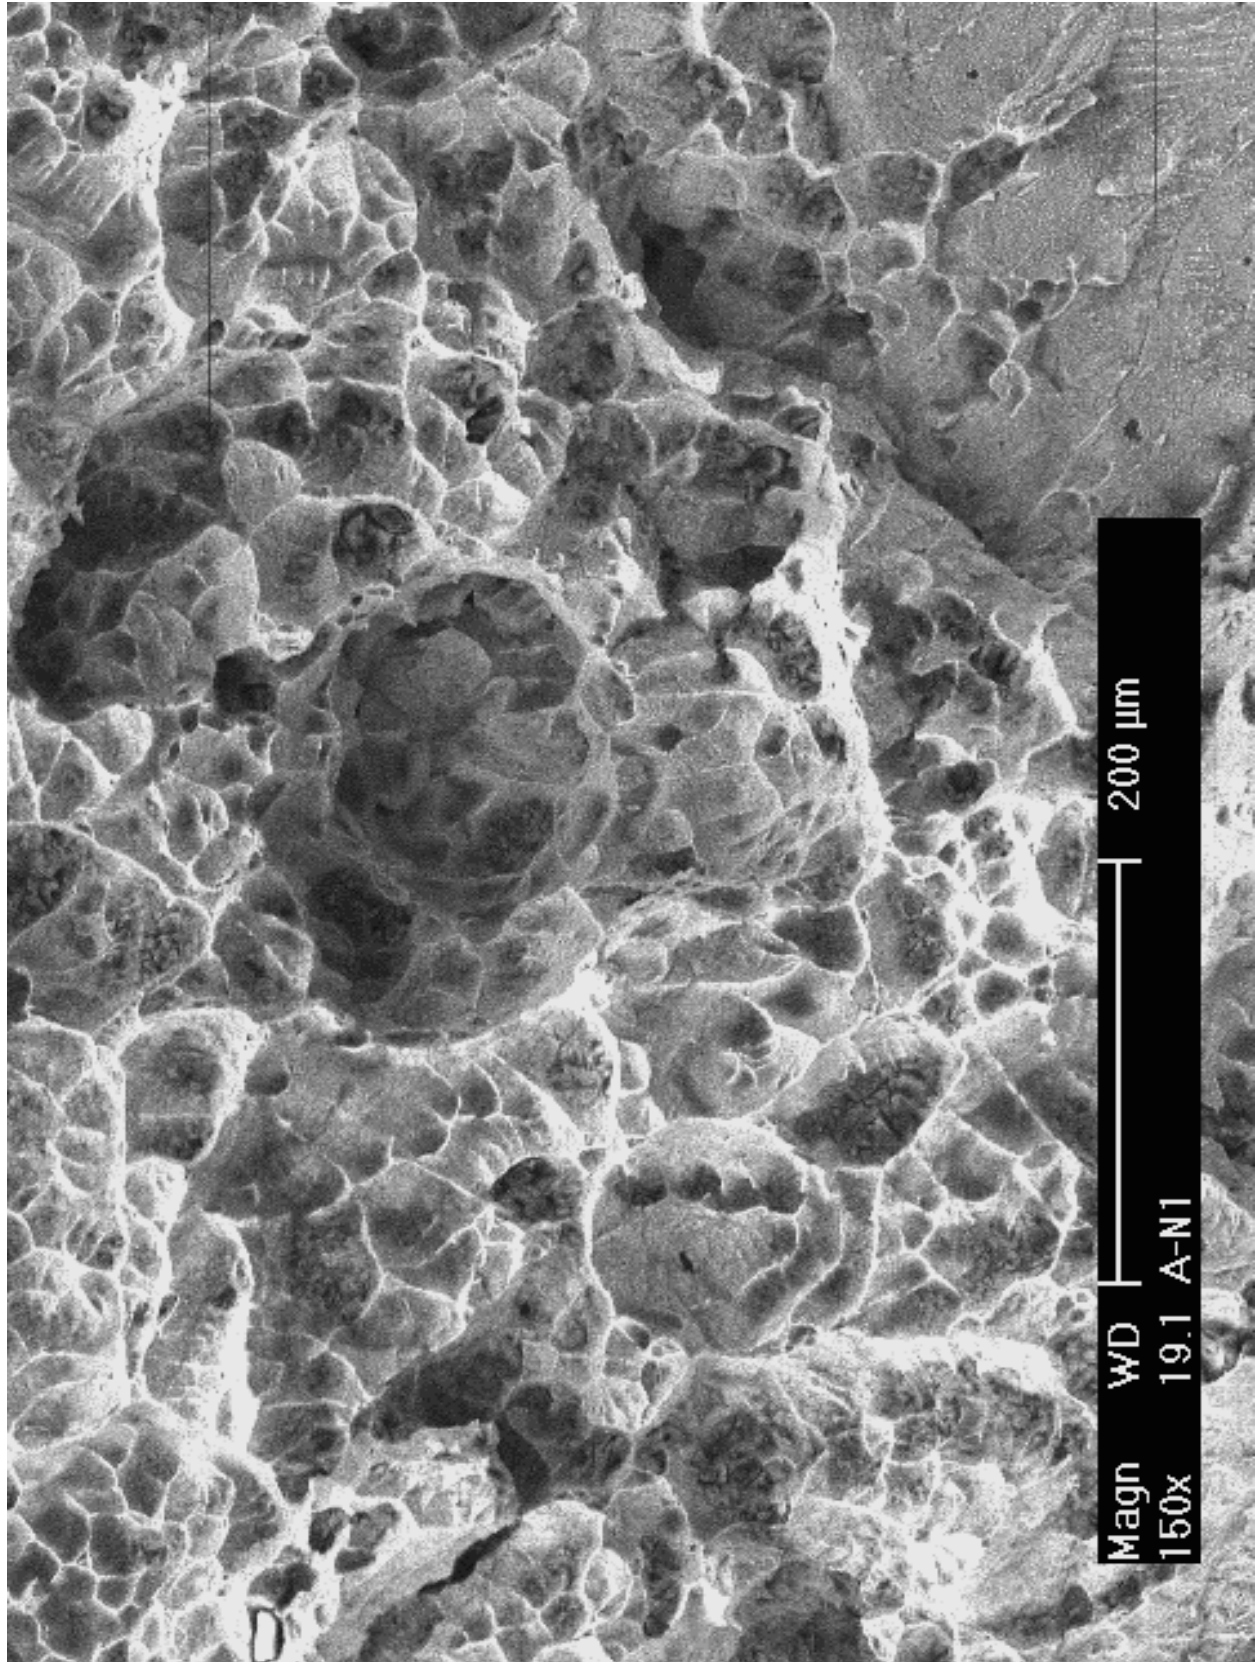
Ductile dimple fracture in JR test region of specimen A-N1.
